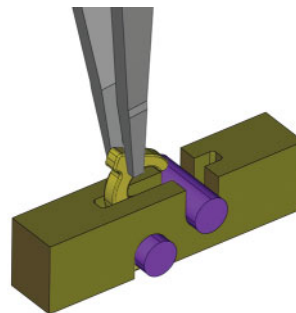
MOVE THE CONTACT OVER THE DEVICE SIDE ELASTOMER USING A NON-METALLIC TWEEZERS; PRESS UP ON THE LOAD BOARD SIDE OF THE CONTACT TO AVOID DAMAGING THE ELASTOMER.
